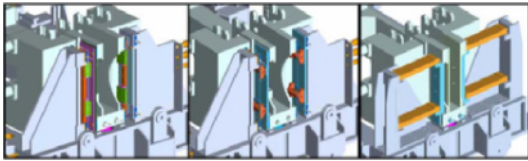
Guiding mechanism types (LM guide, Roller, Plate Spring)
